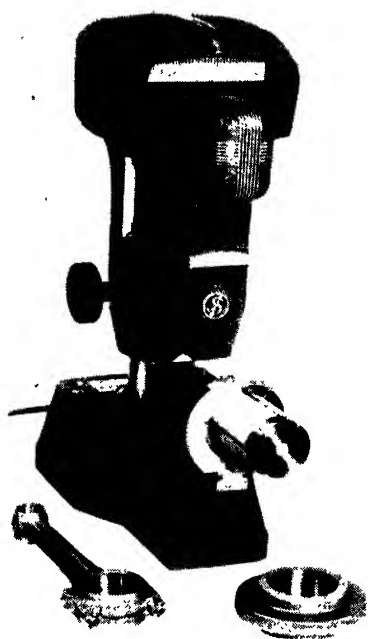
22. Sheffield visual indicating comparator equipped for checking internal diameter of connecting-rod big-end bearing. Master setting ring is shown in front of gage base. (Courtesy of The Sheffield Corporation.)
